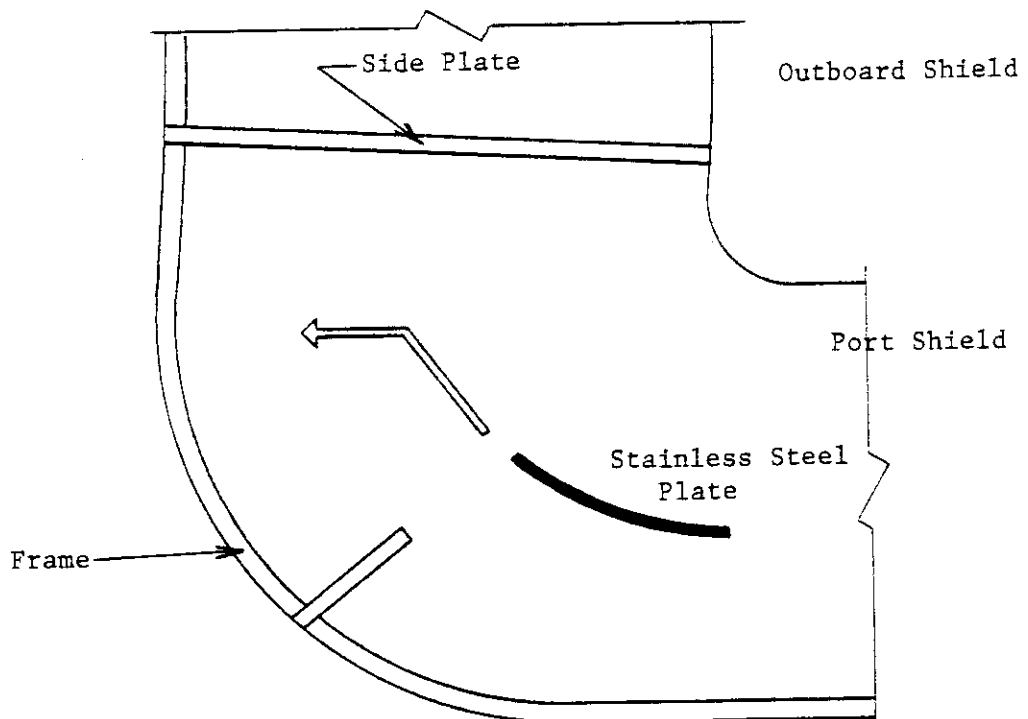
Assembling of Stainless Steel-Water Shield near Port Shield
